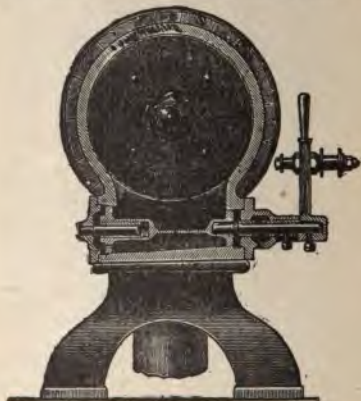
WHELOCK ENGINE, CROSSWISE VERTICAL SECTION THROUGH MAIN VALVE.
